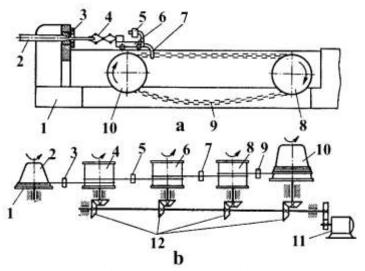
Chain (a) and drum (b) mills; for a: 1 -die-support; 2-billet; 3-reducing die; 4-6-capture device and carriage; 8, 10-sprockets; 9-chain; for b: 1-wire; 2, 4, 6, 8, 10-drums; 3, 5, 7, 9-reducing dies; 1 1-motor; 12-gears
